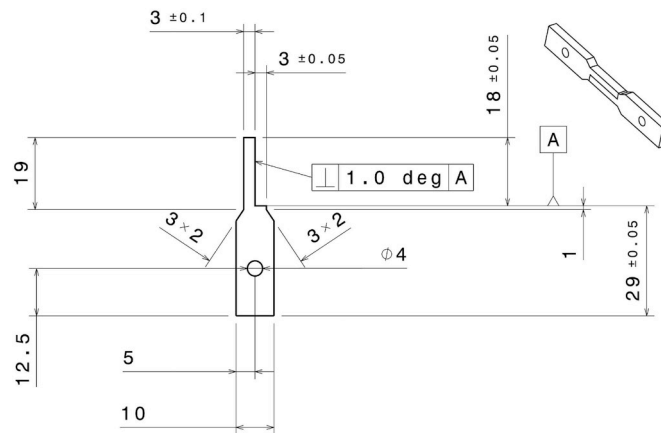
The suggested tensile-loaded fatigue test specimen designated as GE1.
